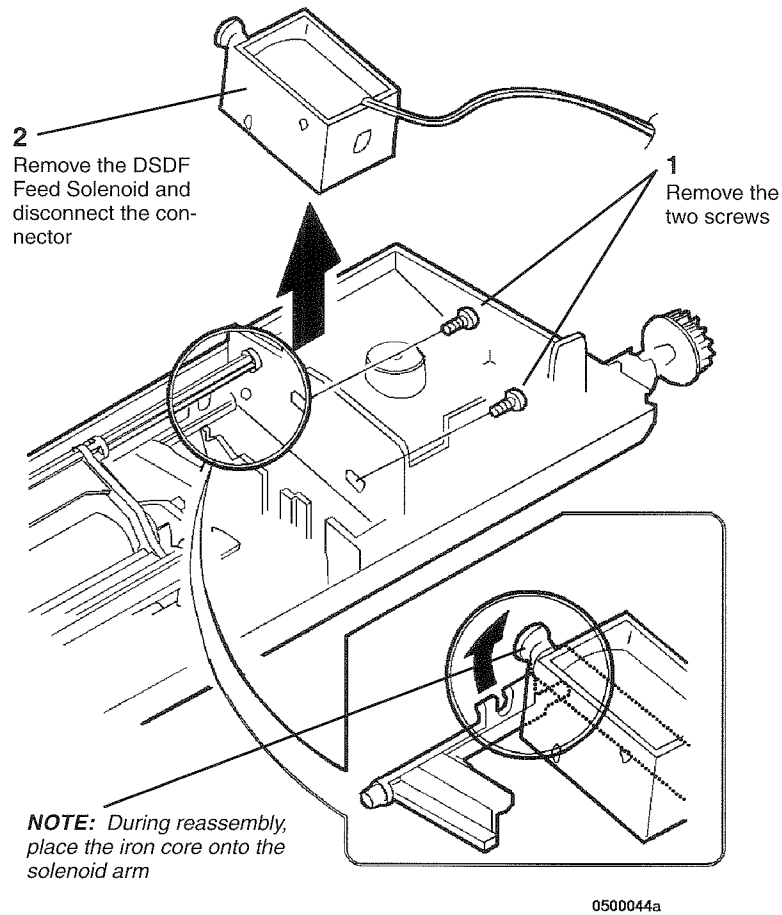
Removing the DSDF Feed Solenoid (SOL1)
